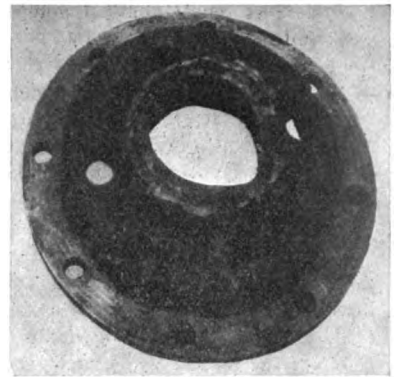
Typical case of extreme bungling in an alleged light racing car.
